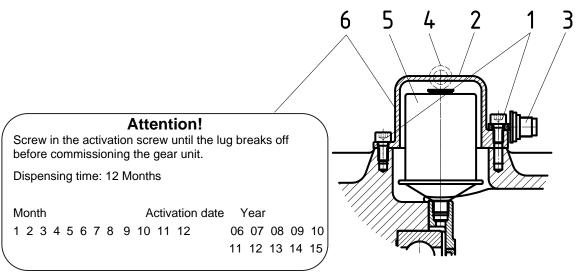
Activating the automatic lubricant dispenser with standard motor mounting
